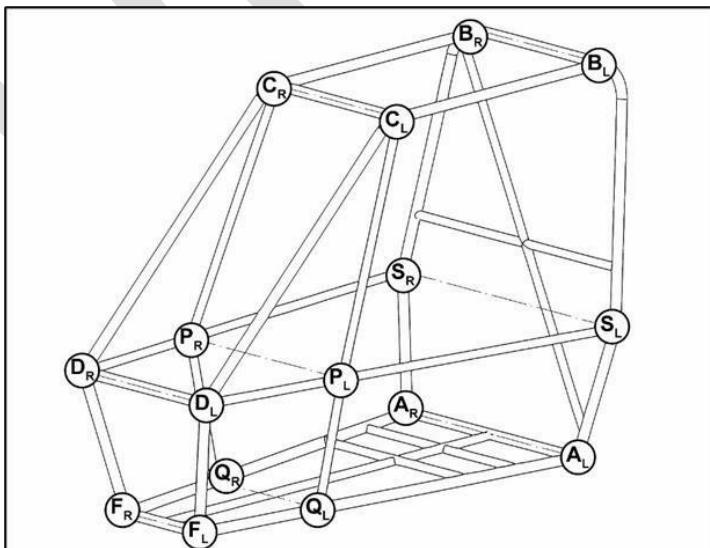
Roll Cage, Named Roll Cage Points, Front Braced Frame
